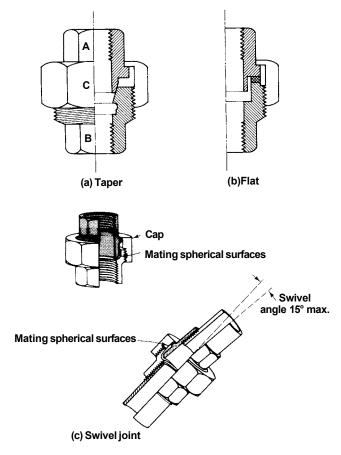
Union joints: (a) taper, ground-in joint; (b) flat joint with washer; (c) spherical joint (swivel joint)
